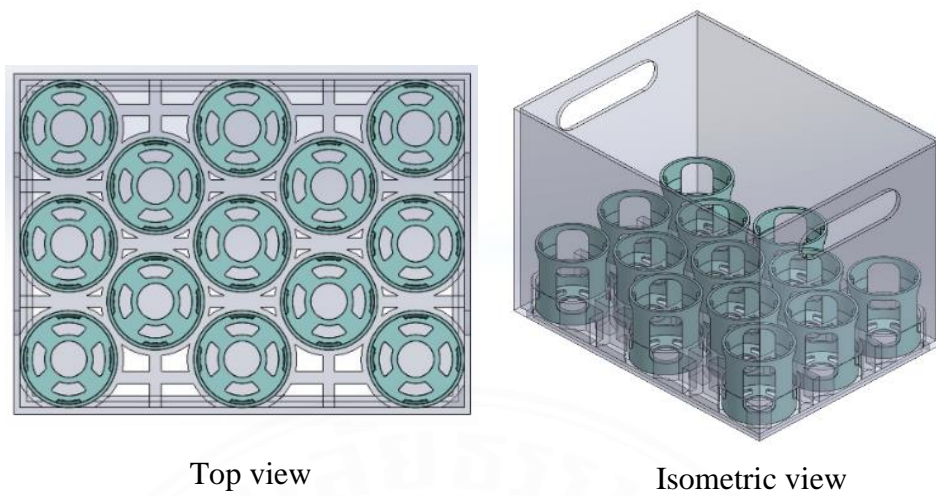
First proposed crate-assembly design with insert plus socket.
